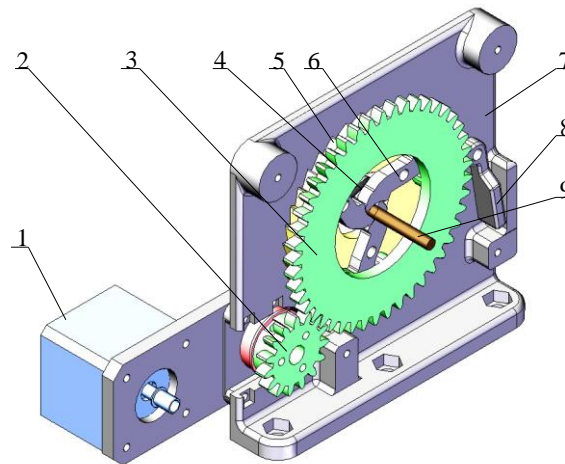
Common reed grab mechanism: 1. Drive mechanism, 2. Drive gear, 3. Driven gear, 4. Rubber ring, 5. Ratchet-wheel, 6. Lever, 7. Housing, 8. Pawl, 9. Common reed section
